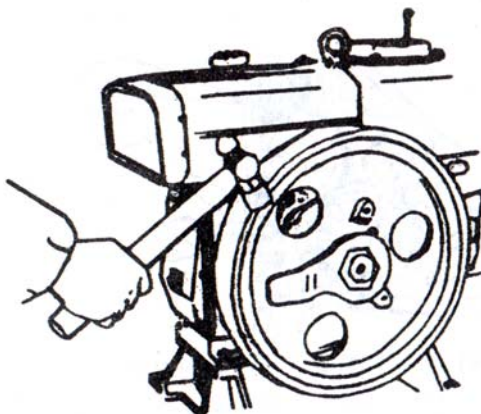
Loosening the flywheel nut by knocking the handle of the wrench with a hammer.
